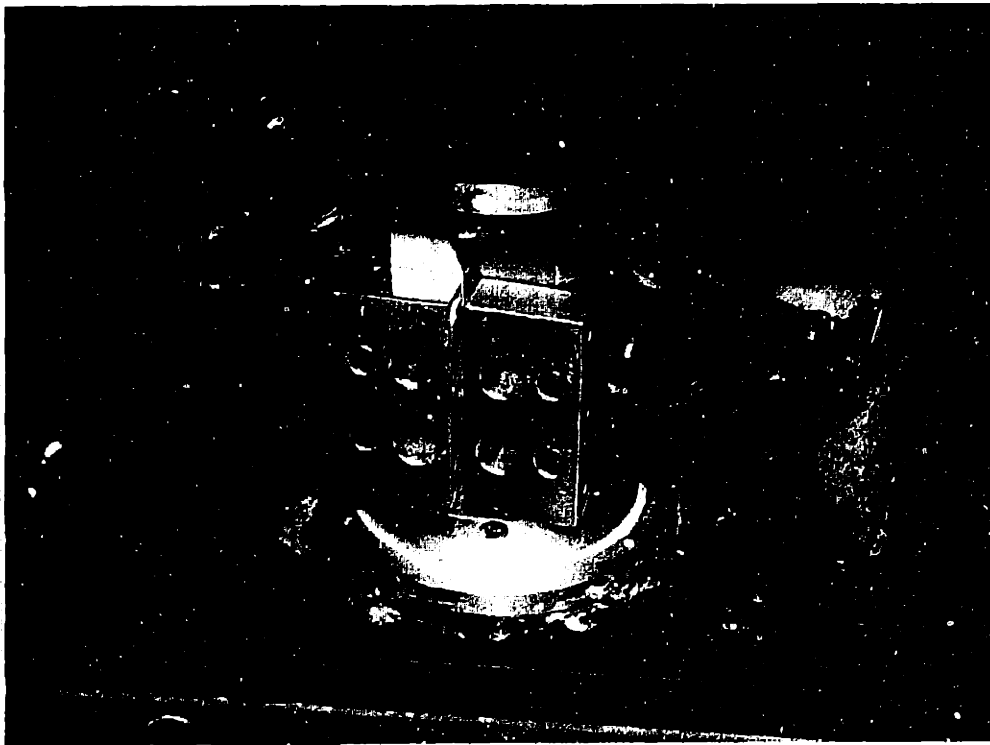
Doubled-ended toolarm installed on machine. Note aluminum clamp.
